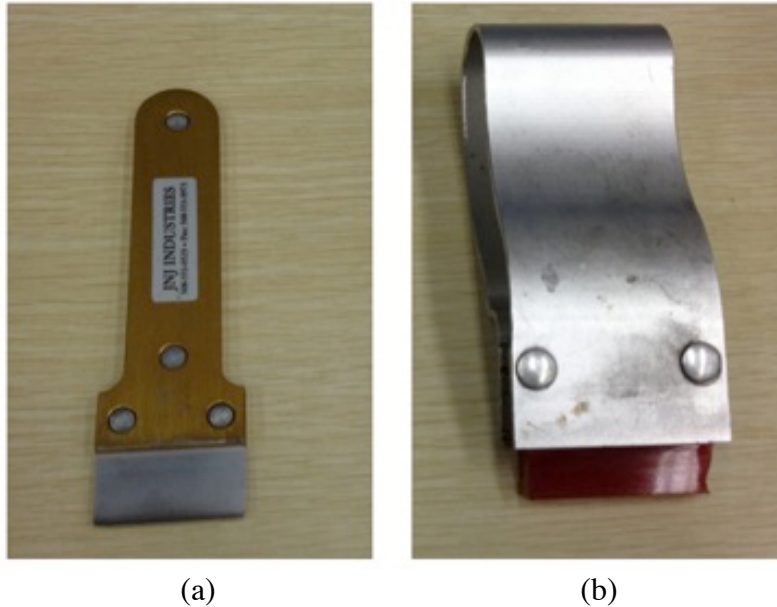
The squeegees used for stencil printing process: (a) metal squeegee; (b) rubber squeegee.
